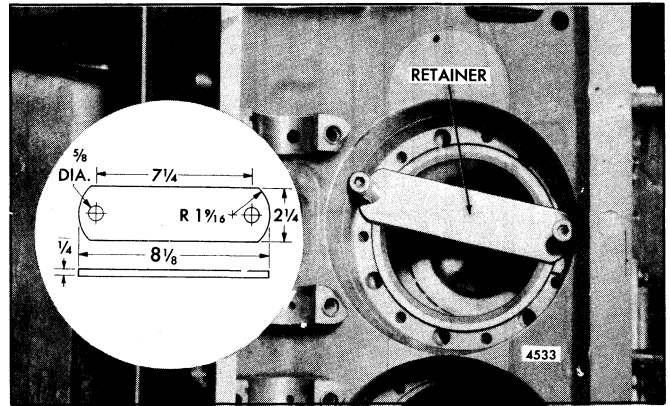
Cylinder Liner Retainer and Instructions for Fabrication
